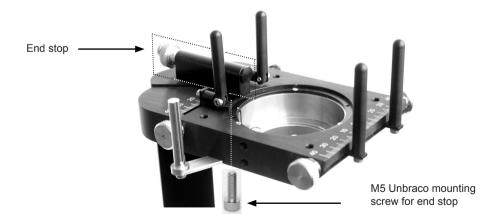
The end stop mechanism and its M5 Unbraco mounting screw.
